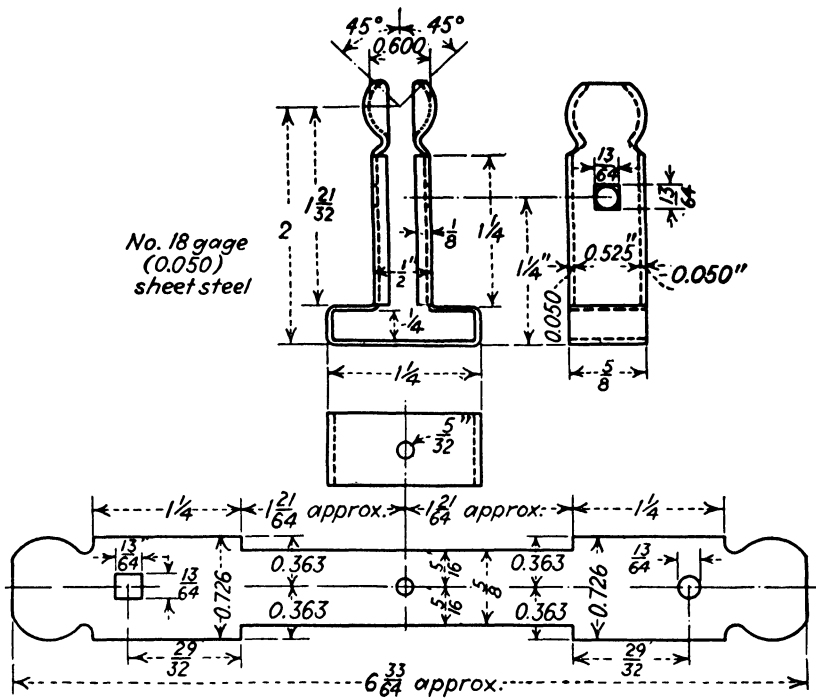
At the top is the finished part that is to be riveted on the heat-deflector shield. Below is the blank development, all bending allowances having been included.
